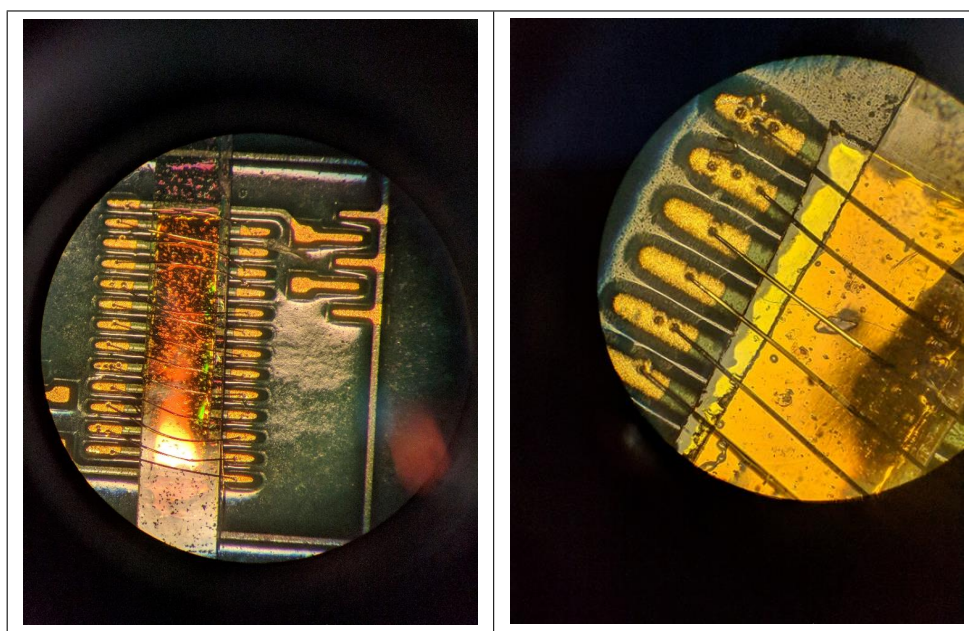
Visual microscopic inspection of manufactured PCB wirebond inductor for efficacy of process.
